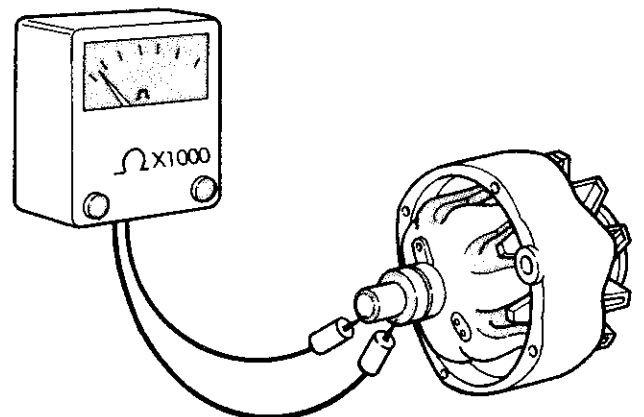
Rotor (Field) Winding-Short Circuit-to-Ground Test
